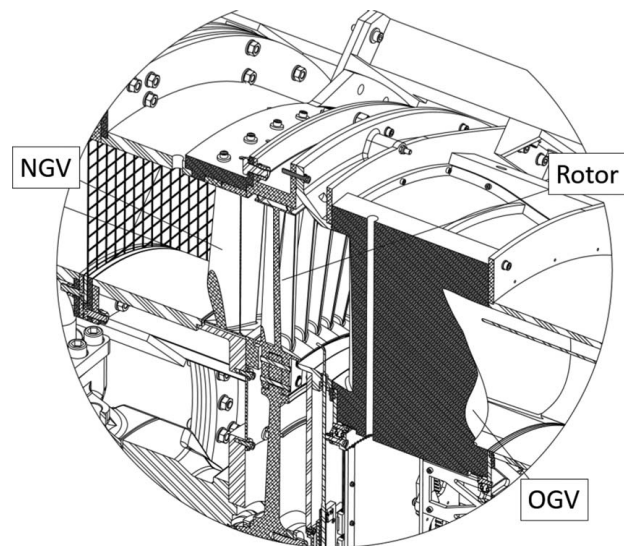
Isometric section cut of the rotor, and test section showing location of nozzle guide vane, LPT rotor, and OGV
